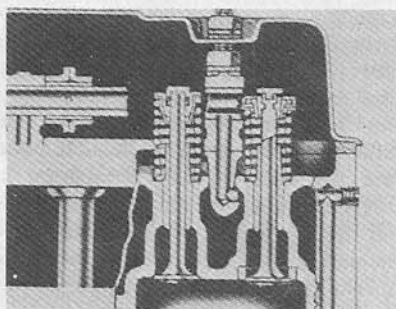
Model TO30 engine valve arrangement. Exhaust valves are equipped with positive type rotators and valve caps, and the inlet valves are equipped with only the valve stem caps.
